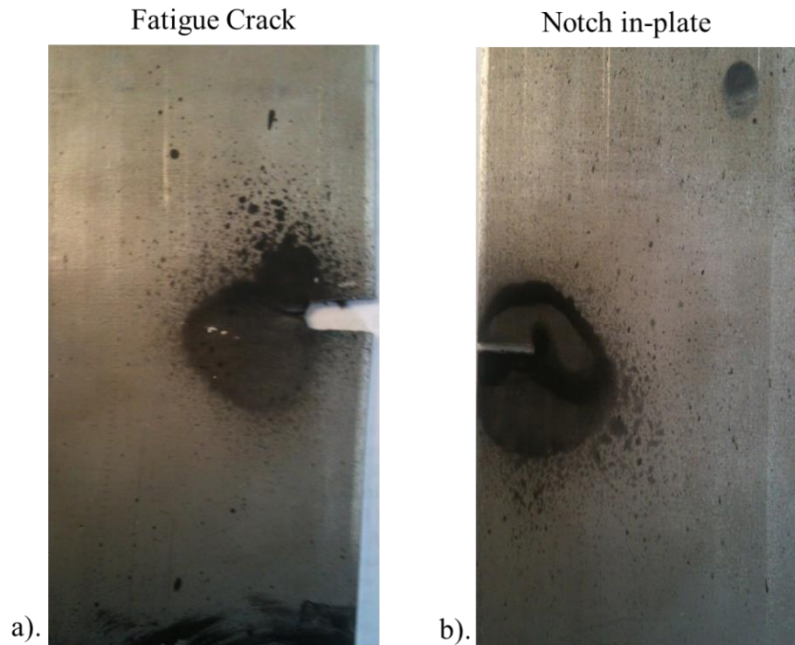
Notch-in-Plate Specimens With a) Growing Fatigue Crack and b) No Crack
